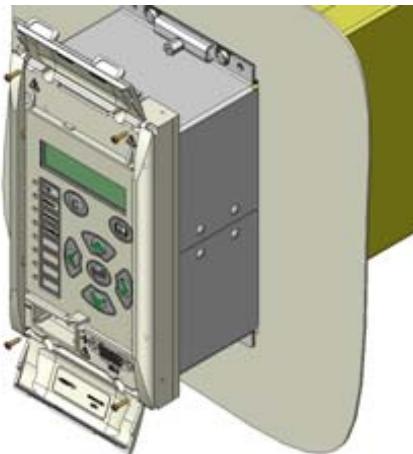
Where an RS485 communication port is required, remove MCGG22 rear blank panel (retain screws).
